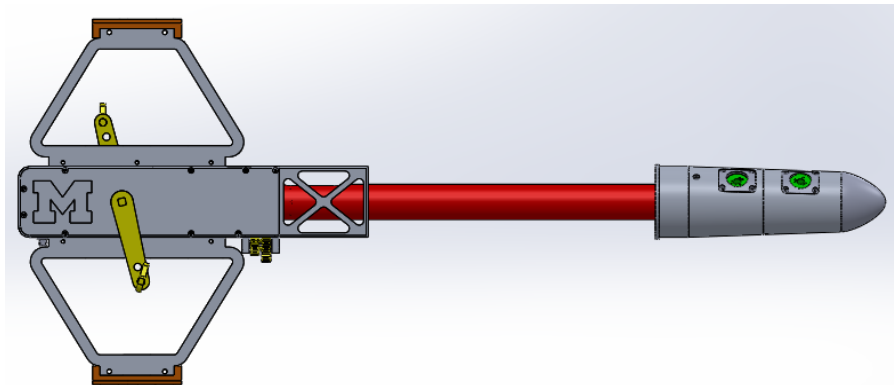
The structural tube (red) rigidly connects the hub assembly and gearbox.
